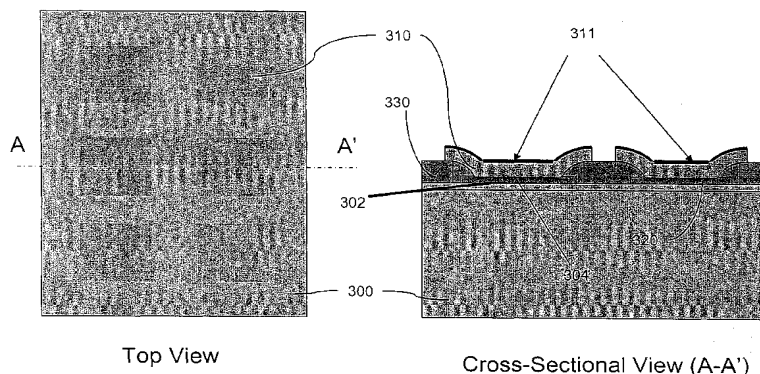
Die with Solderable Metal Contacts for Direct Printed Circuit Board Mounting
